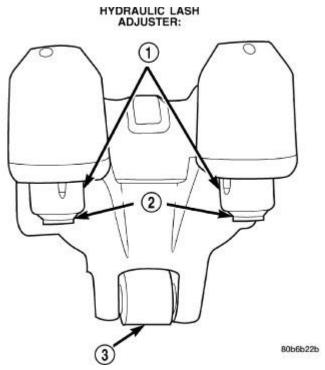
Rocker Arm Assembly Courtesy of CHRYSLER LLC
